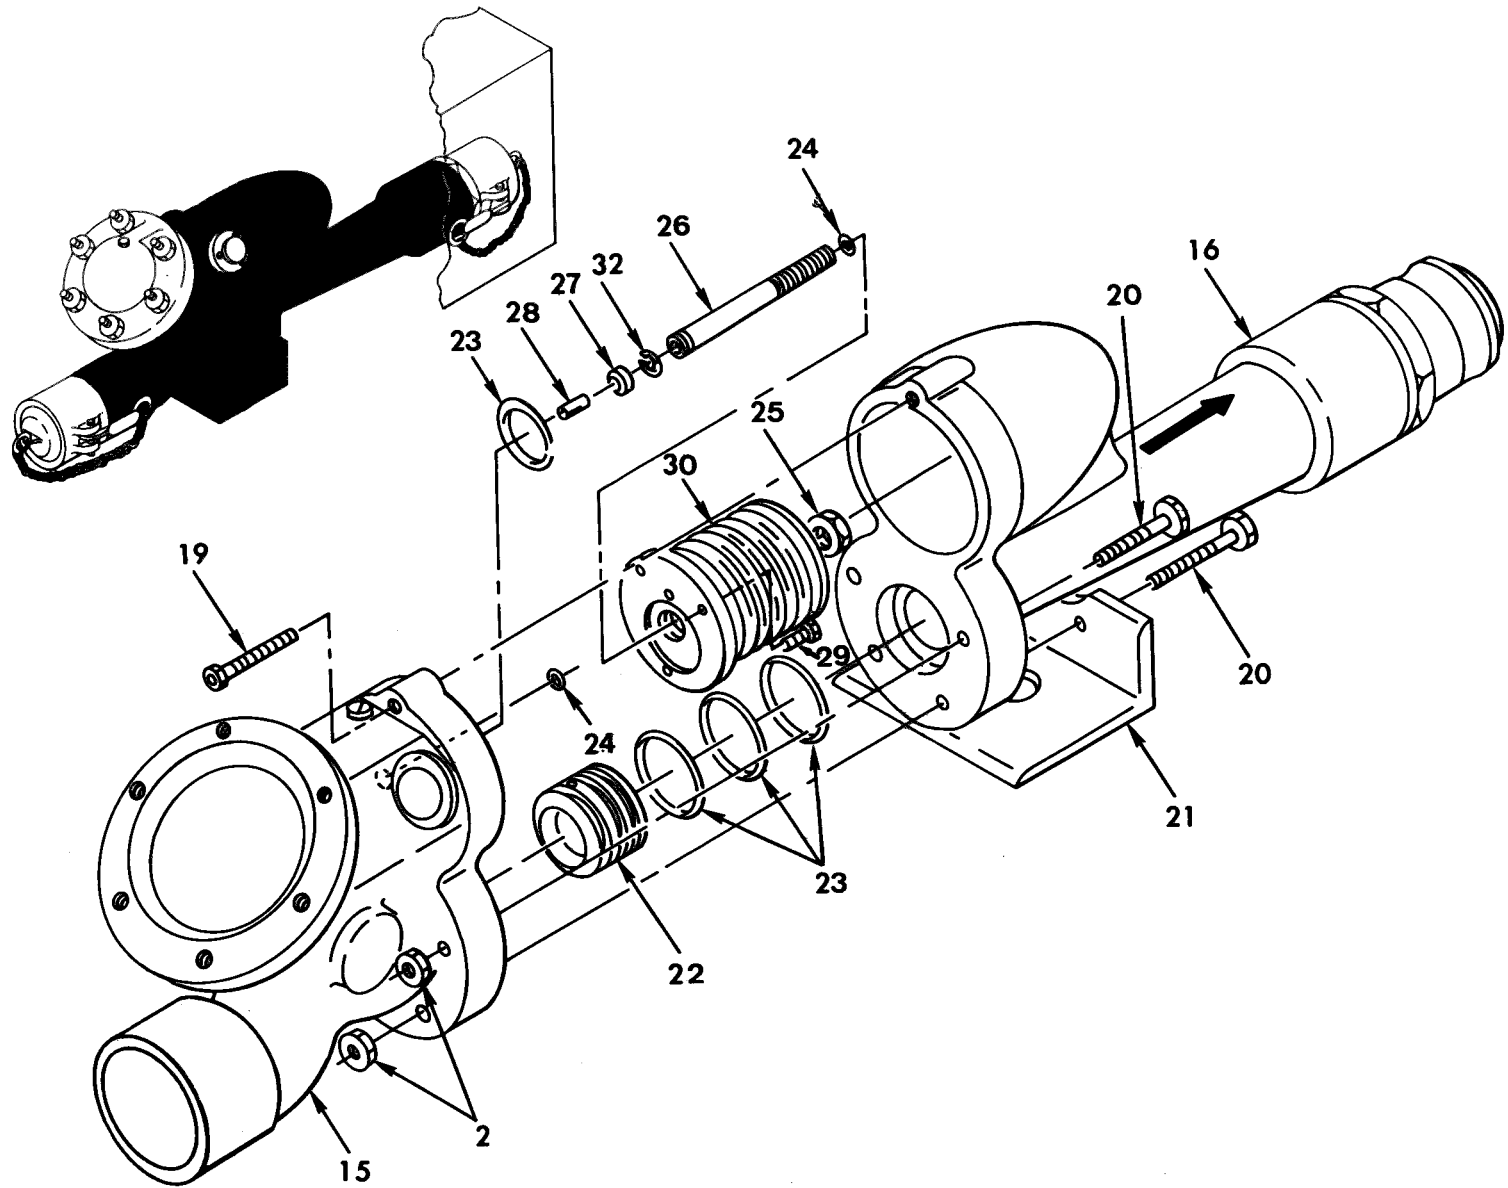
Pressure Control Assembly (Sheet 2 of 3)
